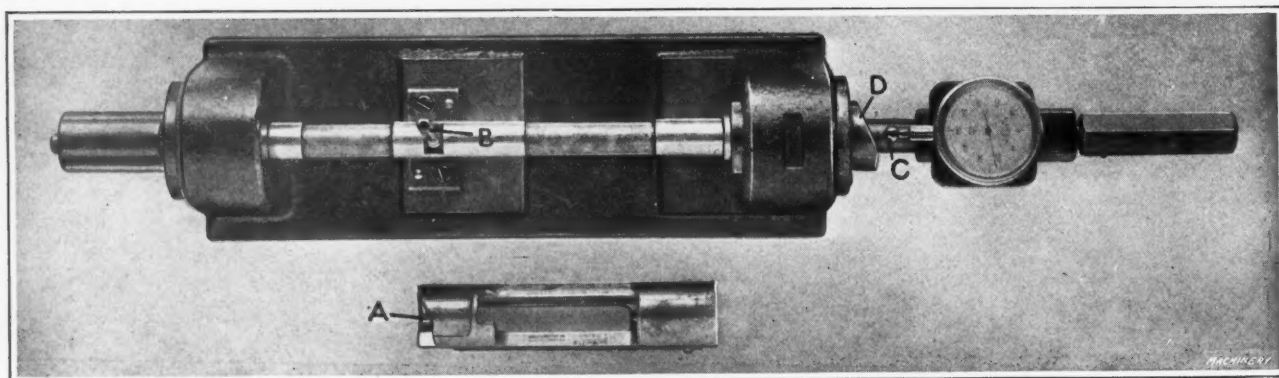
Application of the Dial Indicator Contour Gage in inspecting the Cam Surface of a Part
